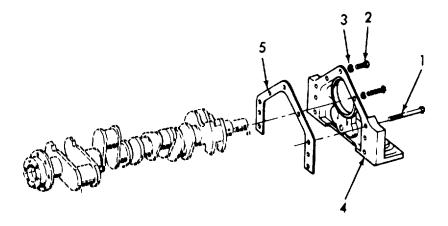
Crankshaft Front Cover, Removal/Installation.
